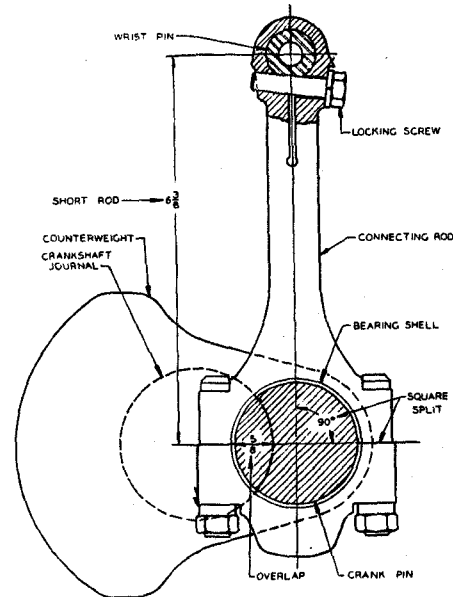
The 38-90 crankpin bearings overlap the crankshaft journals
